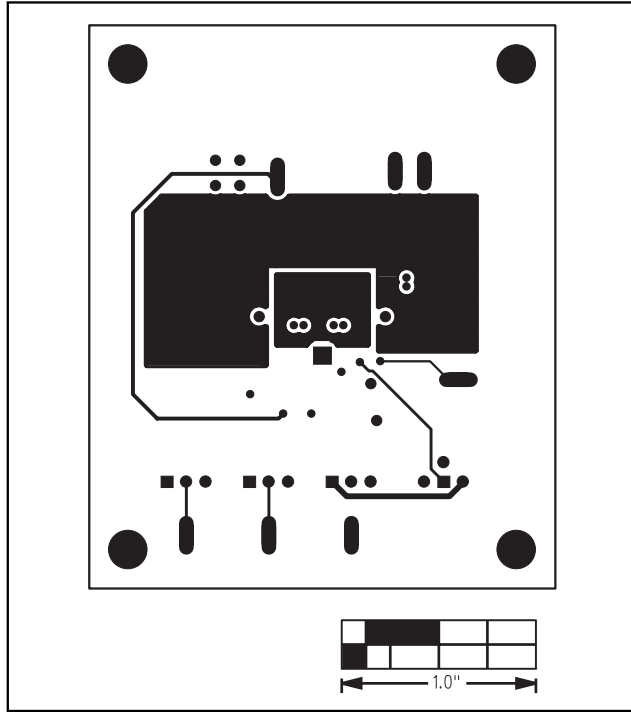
MAX1536 EV Kit PC Board Layout—Solder Side (AGND)
